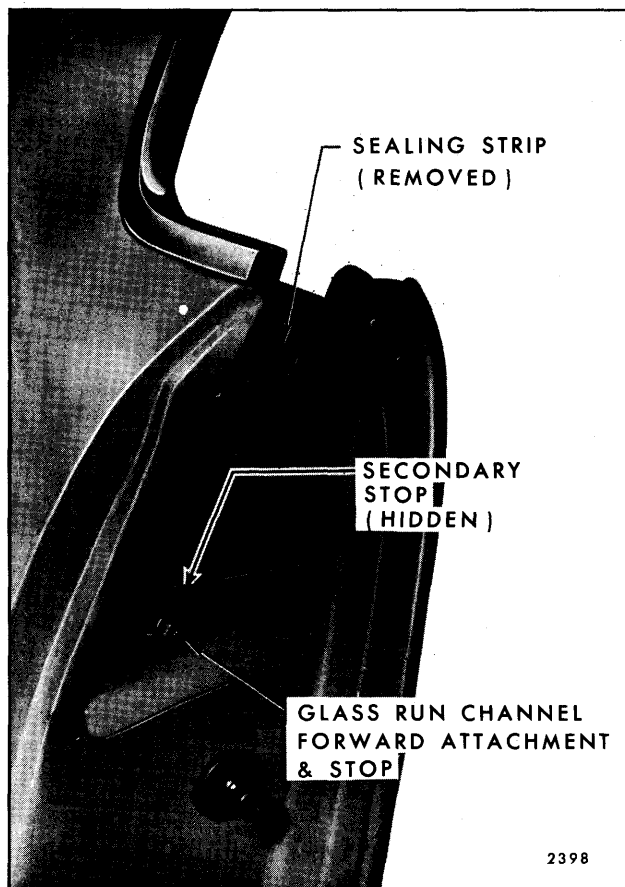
Rear Quarter Window Hardware Attachments on Lock Pillar
